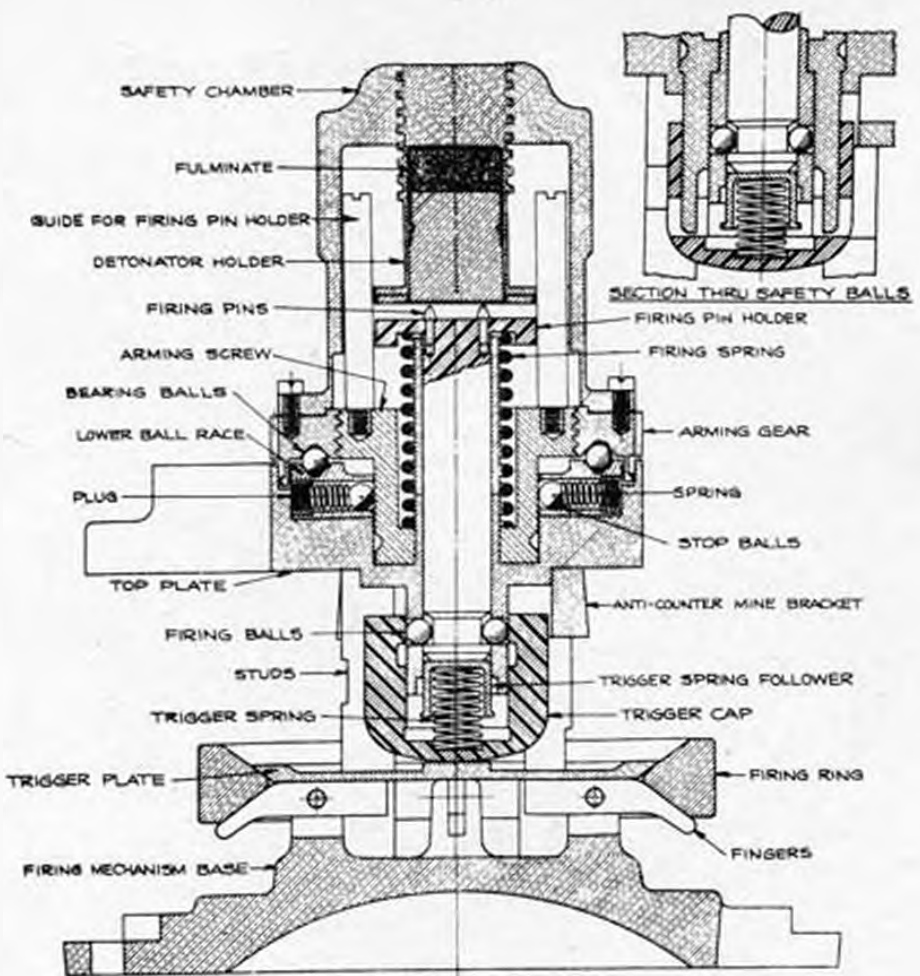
Mk. 4 Type Exploder, Unarmed
